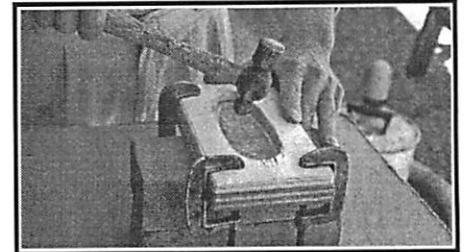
When forming aluminum bumps, the metal is clamped between a pair of plywood boards that have a hole the shape of the bump cut out of them.
